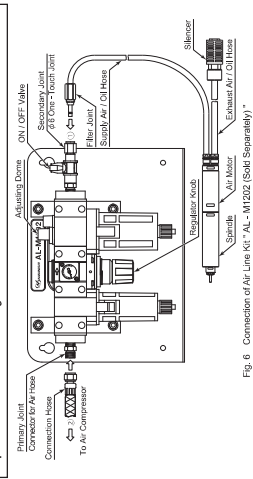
Connector of Air Line Kit (AL - M1202 (Sold Separately))
